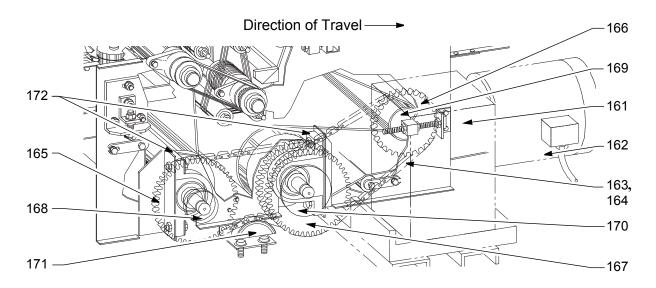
Drive Assembly, Dual Drive Diverter
